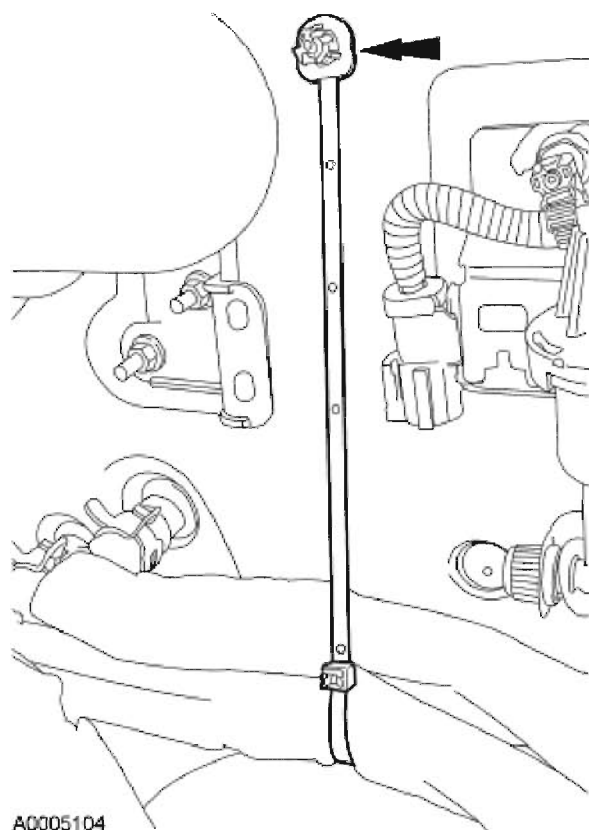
Locating Accelerator Cable Snow Shield & Retainers
